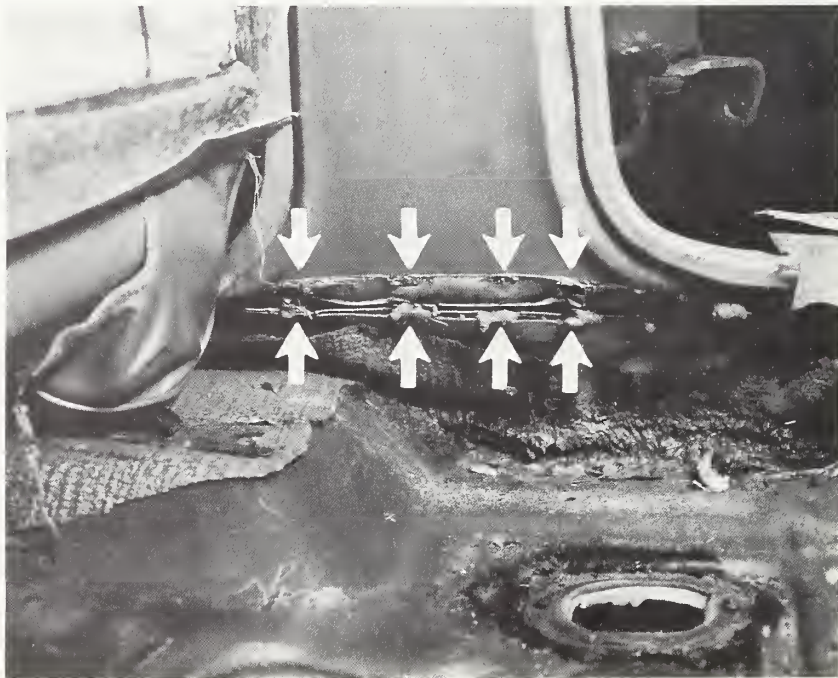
FRACTURE OF WELDED JOINTS AT BASE OF B PILLAR AFTER STATIC CRUSH TEST OF VEHICLE "A" - RIGHT SIDE
